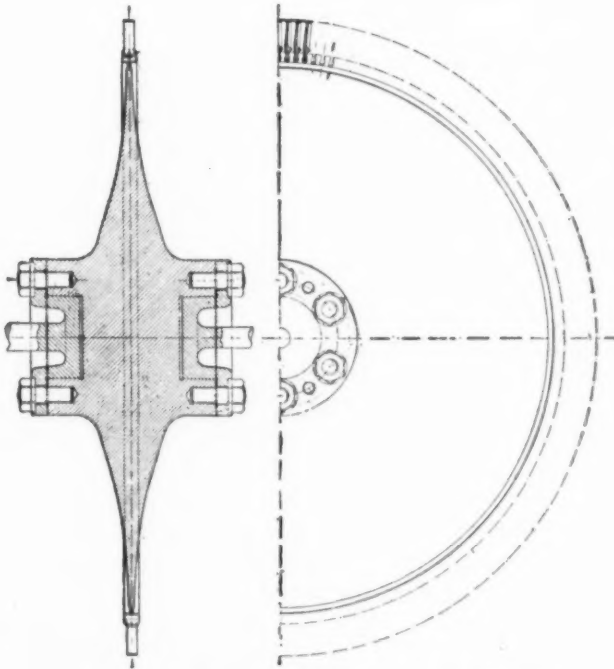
SECTION DE LAVAL TURBINE WHEEL.
